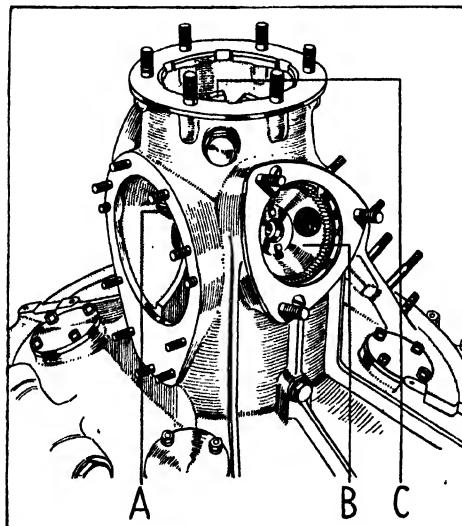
The rear drive shaft in position in the rear cover with "A" the auxiliary drive box facing "B" one of the magneto drive housings, and "C" the starter dog.
